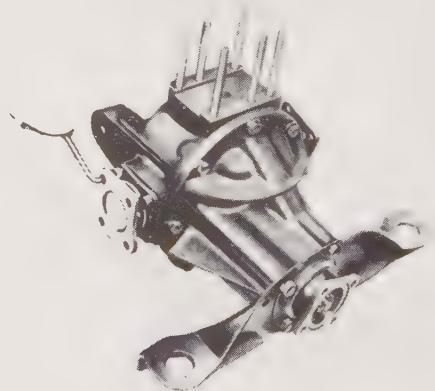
8 Differential unit showing method of unscrewing screws from inner axle shaft bearing housings.
